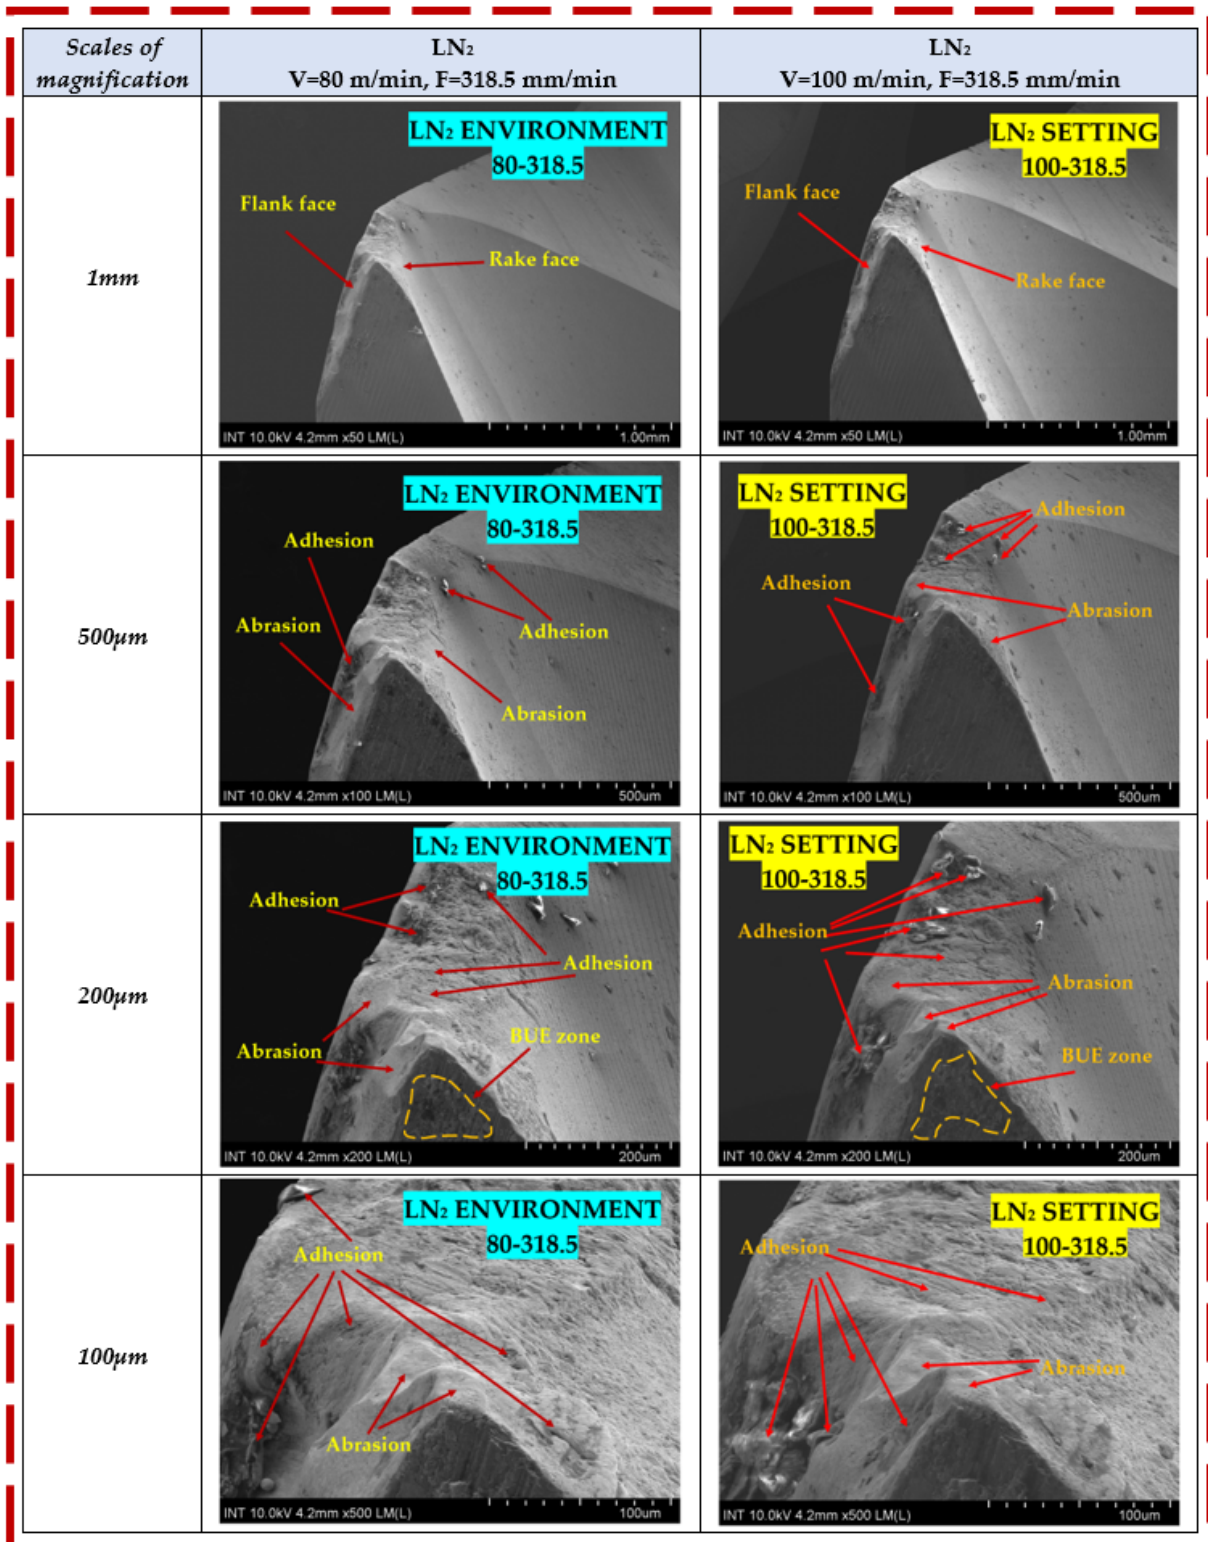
Variation in flank wear and rake wear under LN₂ machining settings at a cutting speed ranging from 80 m/min to 100 m/min and at a constant cutting feed of 318.5 mm/min.
